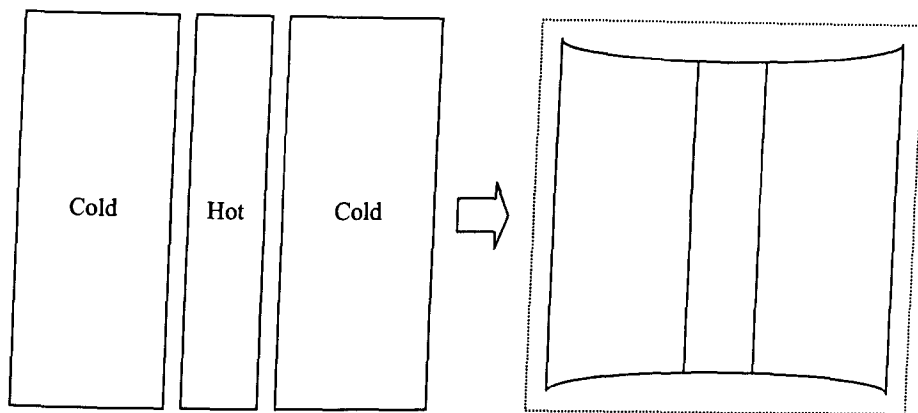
Schematic distortion of a butt-welded plate due to shrinkage of hot weld metal
